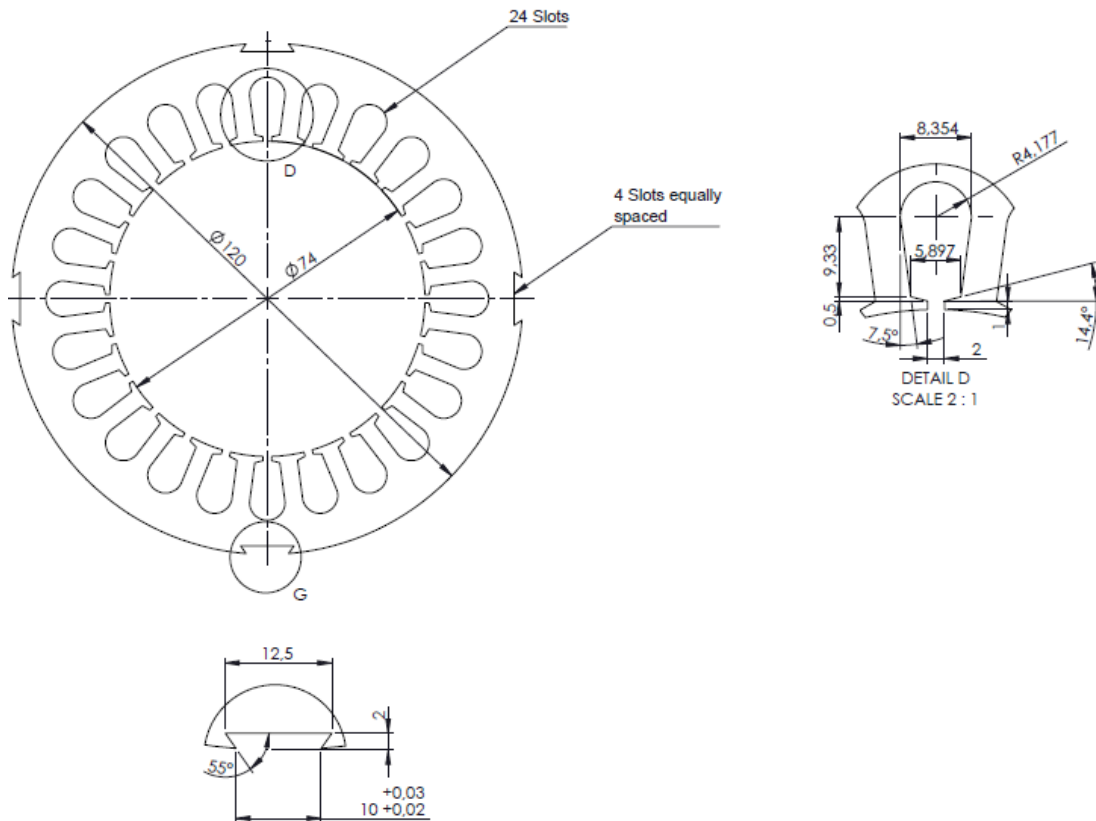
Solidworks Stator Stamping Design for HSPM Generator
